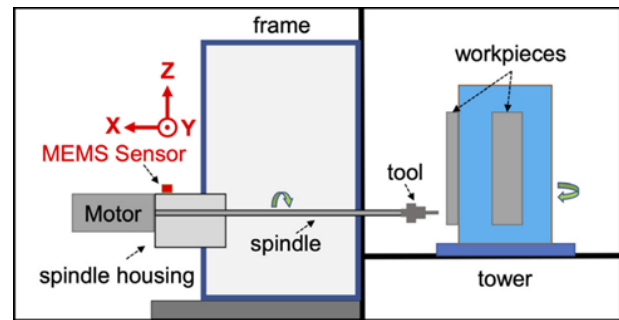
Schematic sketch of the experimental setup: 4-axis machining center with mounted sensor [22].
